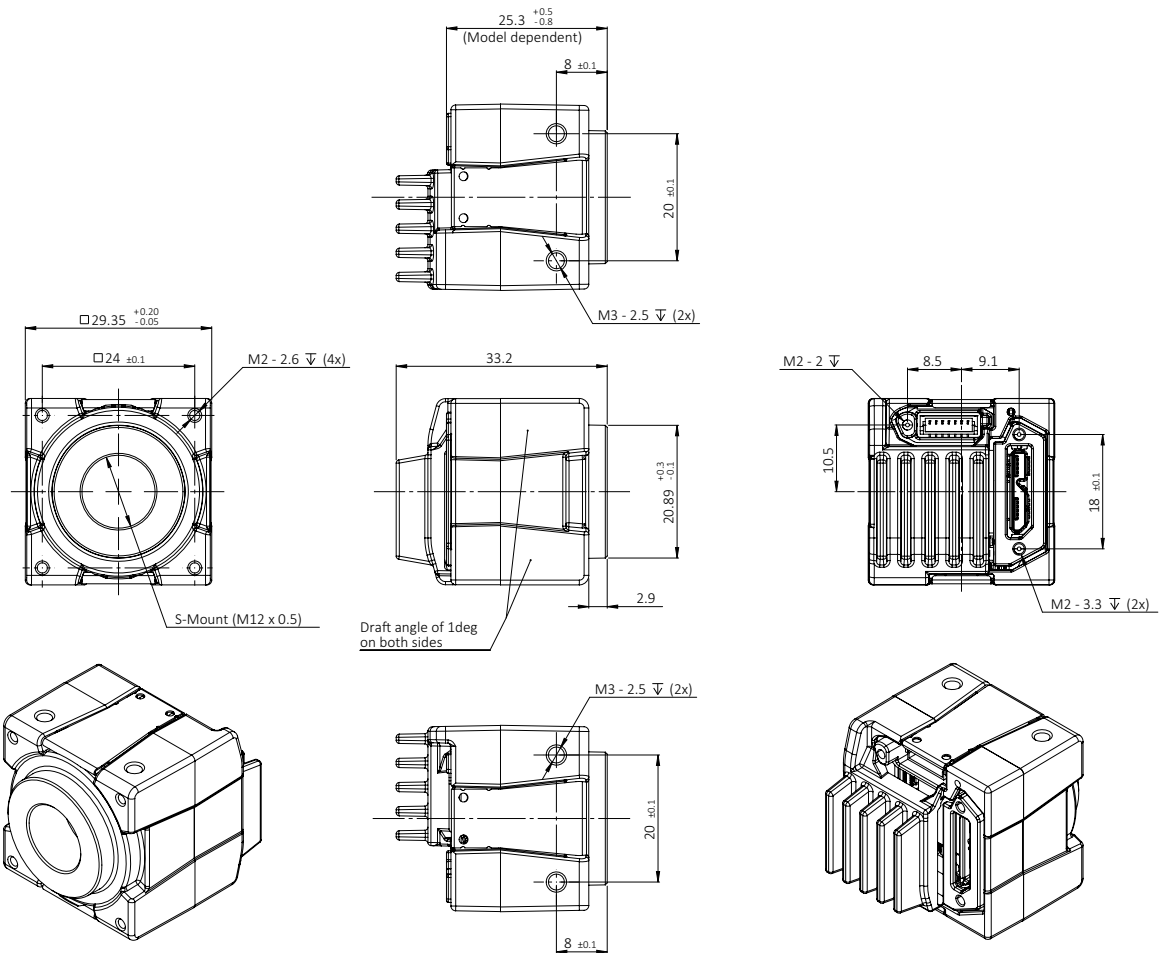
Closed Housing S-Mount 180° (standard Alvium) dimensions
